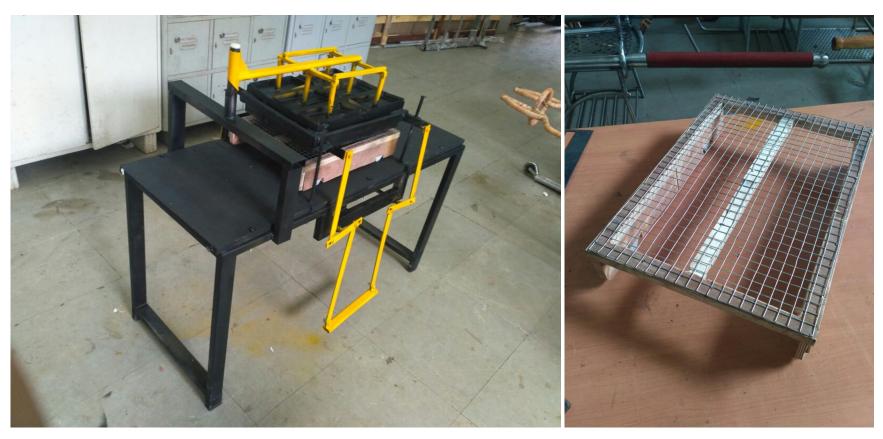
(Final Prototype of the brick moulding machine without the mud loading bay)
